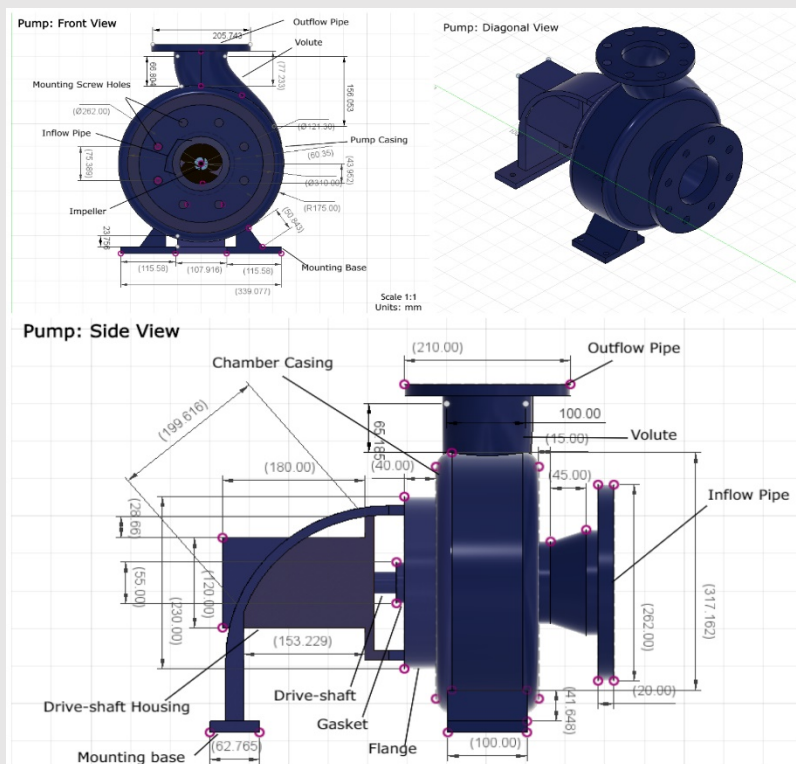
CAD drawing of the impeller device on the CDC's modified centrifugal diffuser pump.
